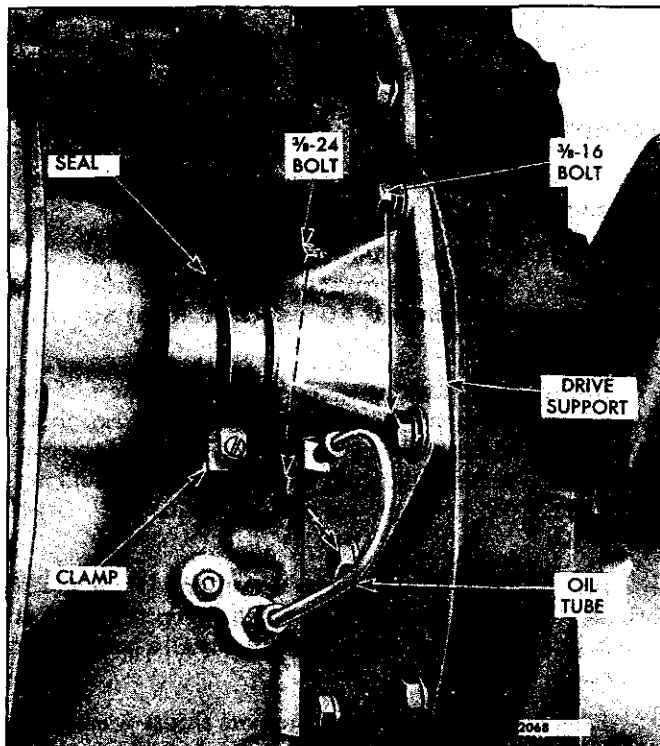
Blower Drive Support Mounting on 4-53 In-line Engine
